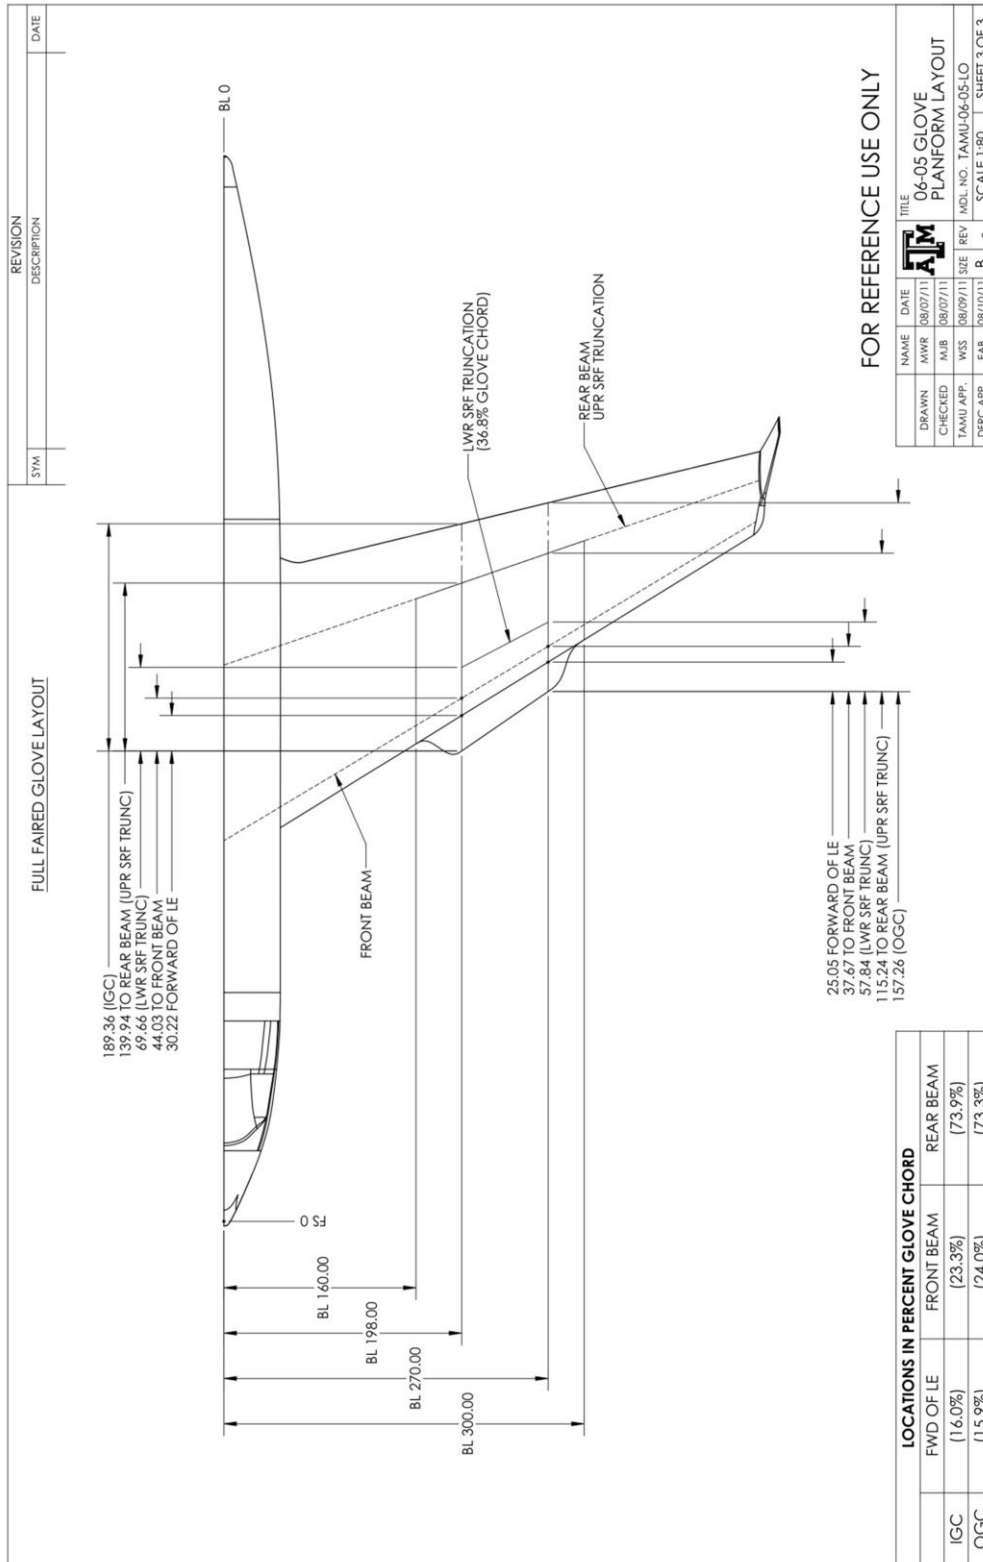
Sheet 3 of the 06-05 Glove Planform Layout drawing: full faired glove layout.
